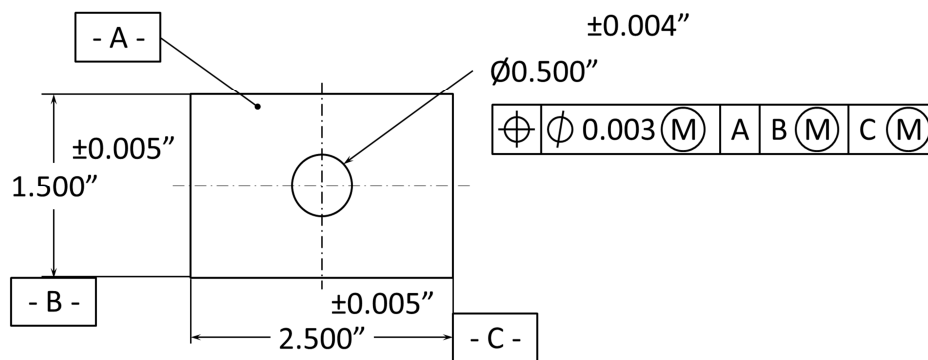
Engineering Drawing for a Plate with GD&T Requirements
